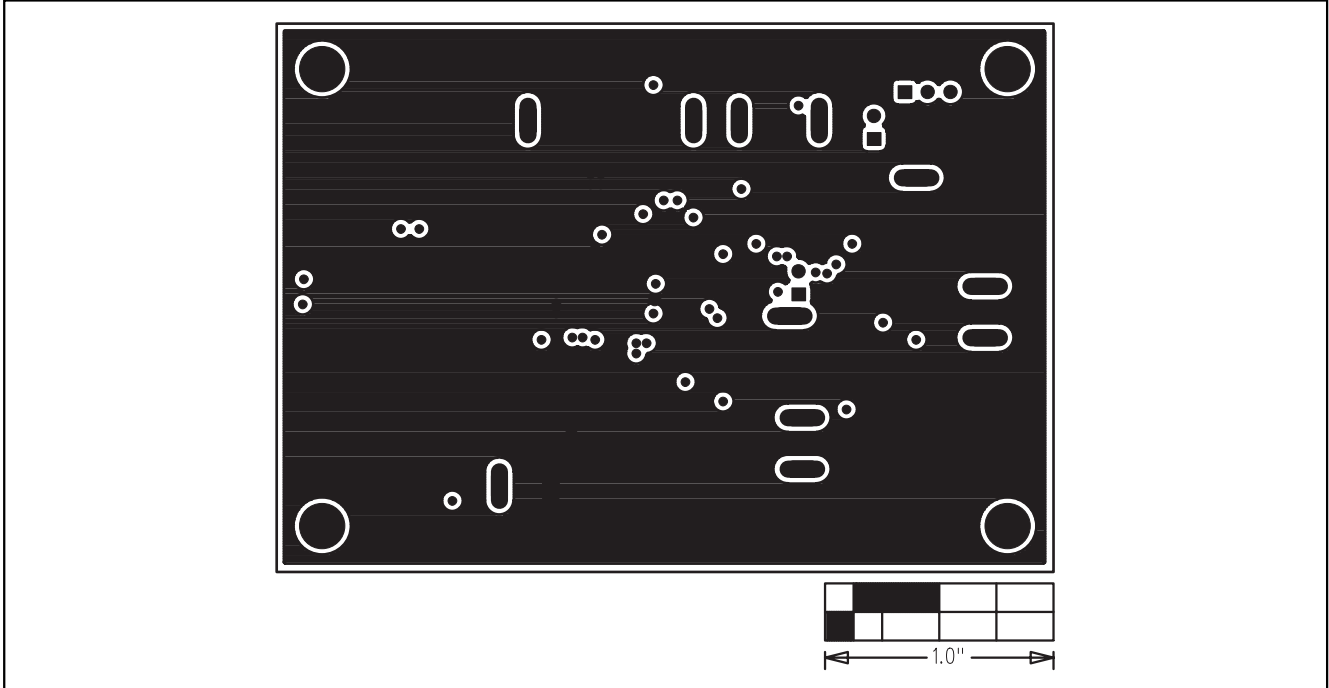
MAX8513 EV Kit PC Board Layout—PGND Layer 2
